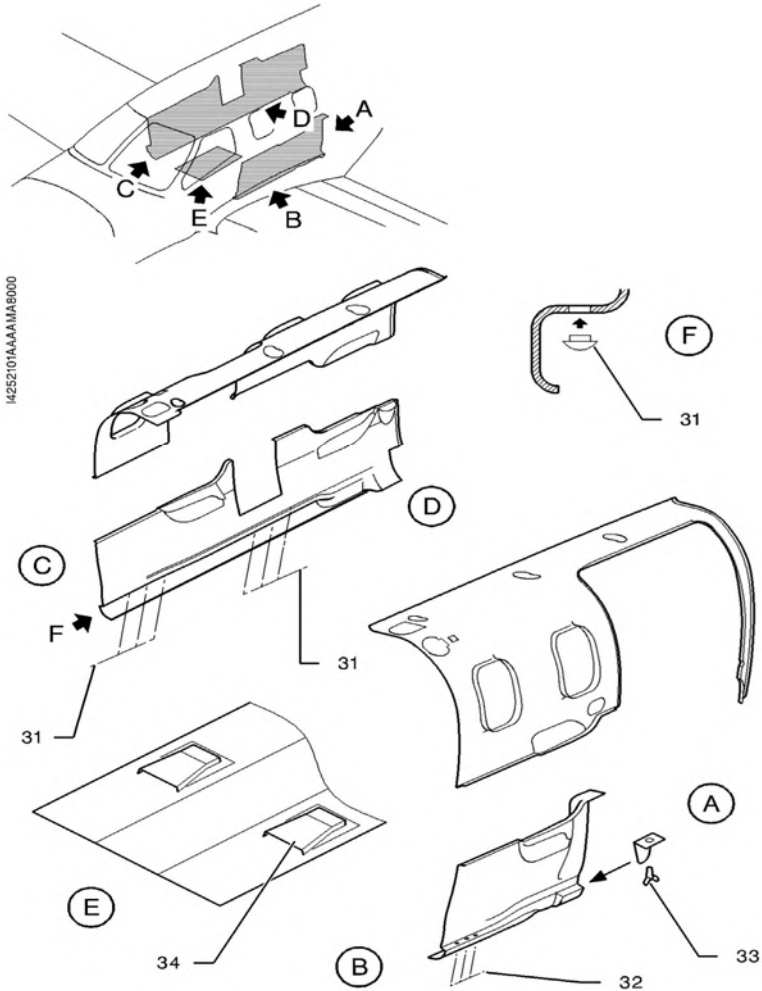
Cabin comfort – Installation of blanking plugs and deflector
